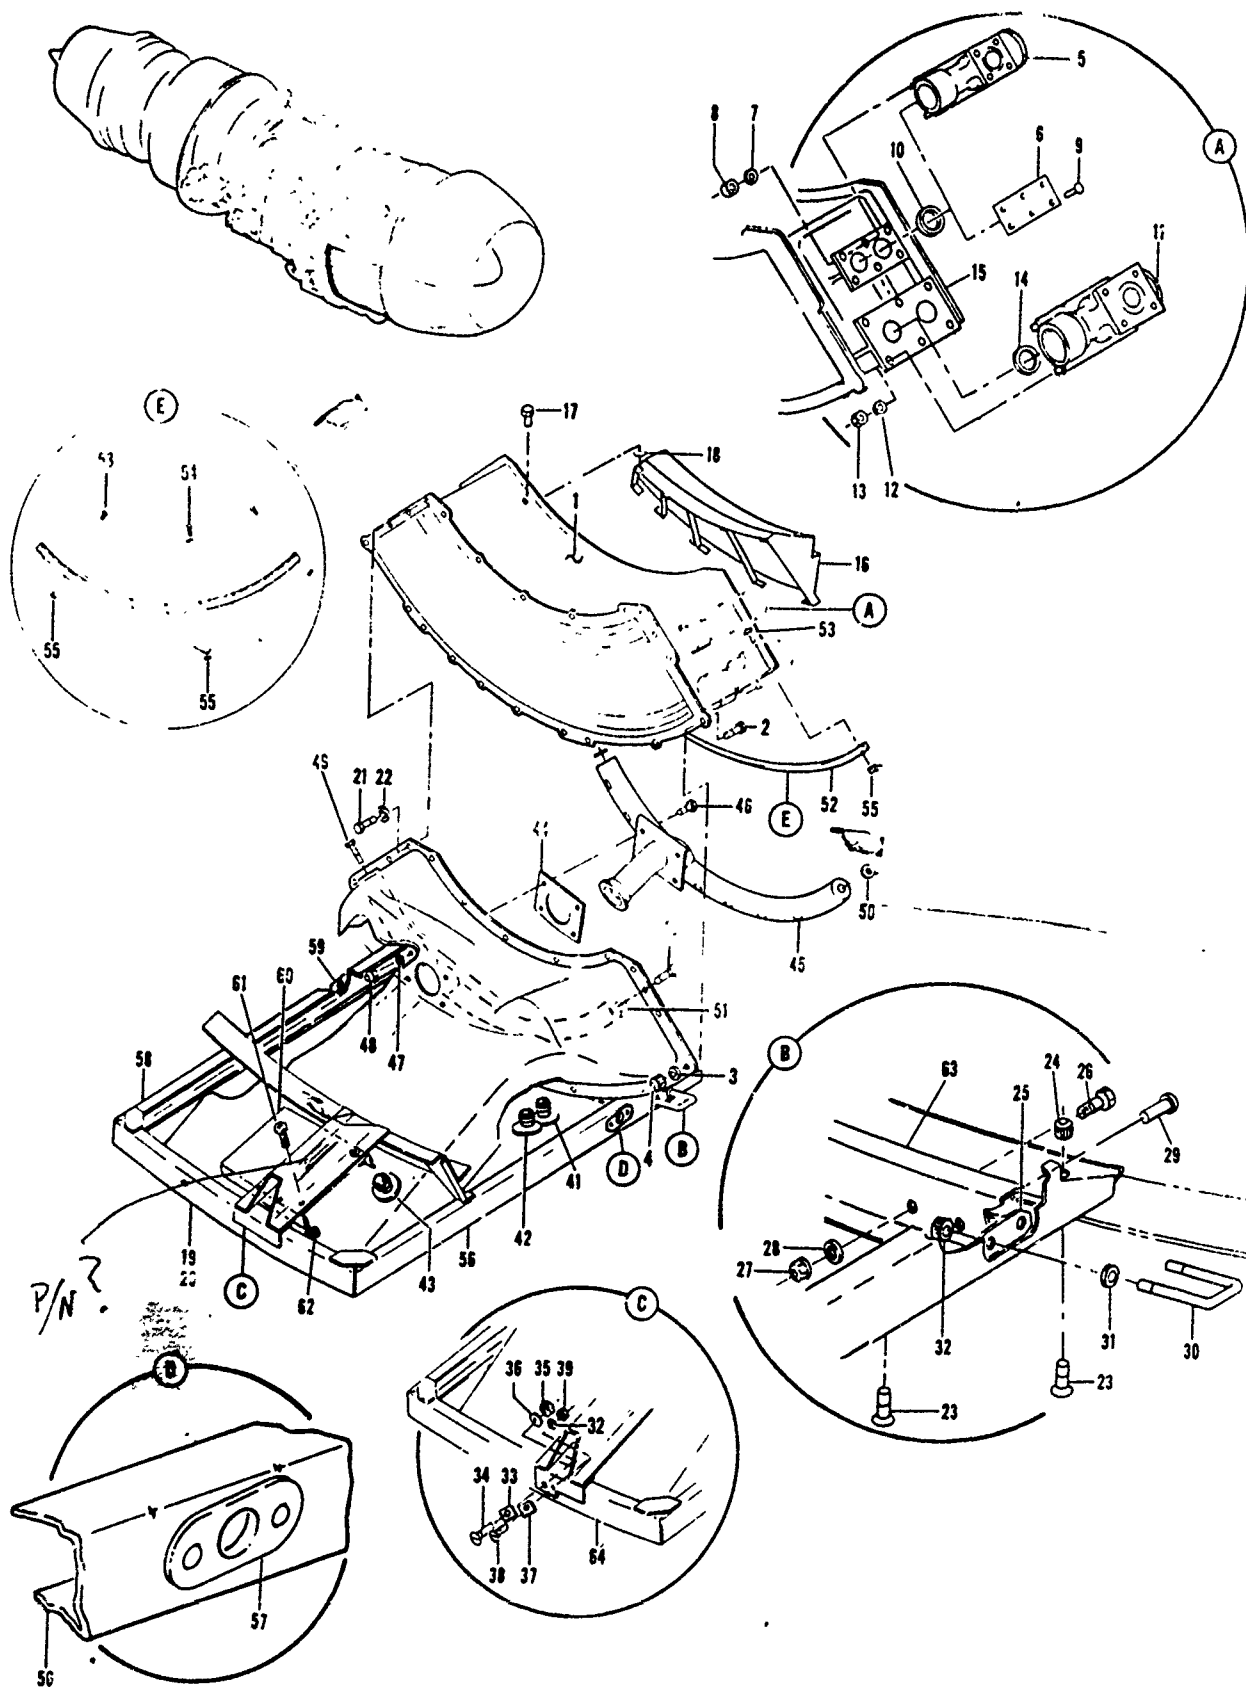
Engine and Generator Drive Oil Cooler Installation
